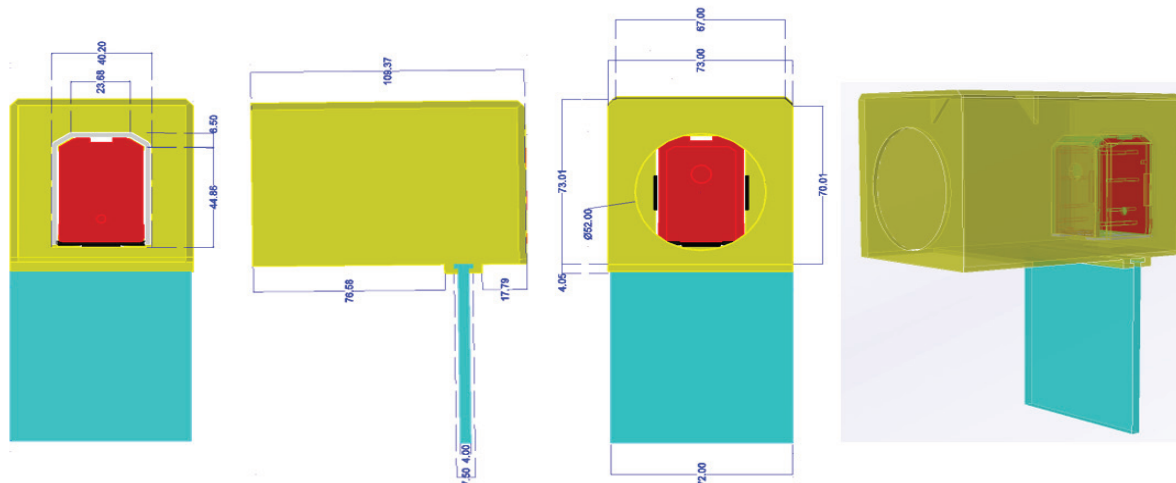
The radiation measurement interface device and dimensions. The measurement unit is millimetre.
